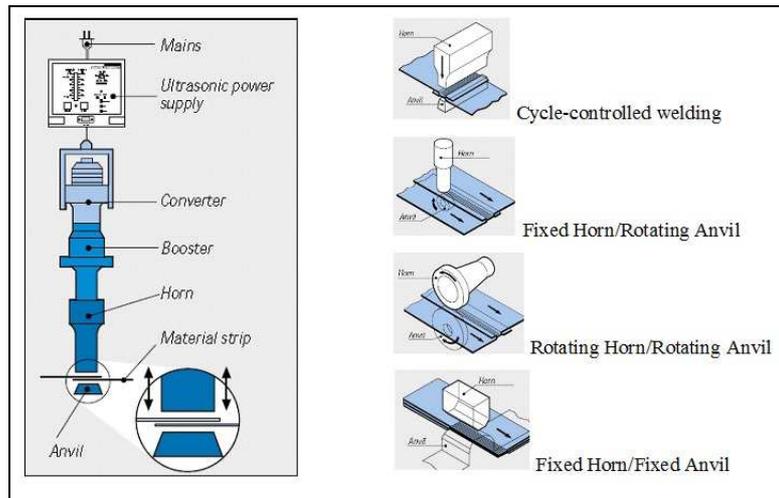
Functional Principle and Kinds of Ultrasonic Welding [5]
